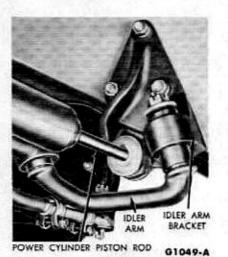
Power Cylinder Piston Rod, Idler Arm and Bracket
